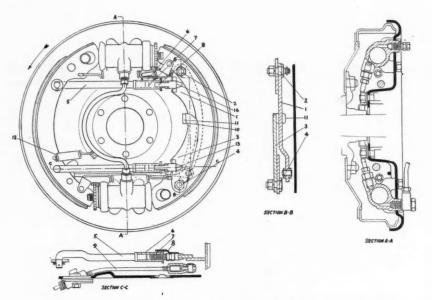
Mechanism for hand-actuation of rear brakes. I, lever pivoted at 2; 3, lever pivoted at 4; 5, strut; 6, adjusting nut; 7, adjusting screw; 9, brake cable; 10, cam surface; 11, lug; 12, unbalancing spring; 13, fulcrum point of lever 3
